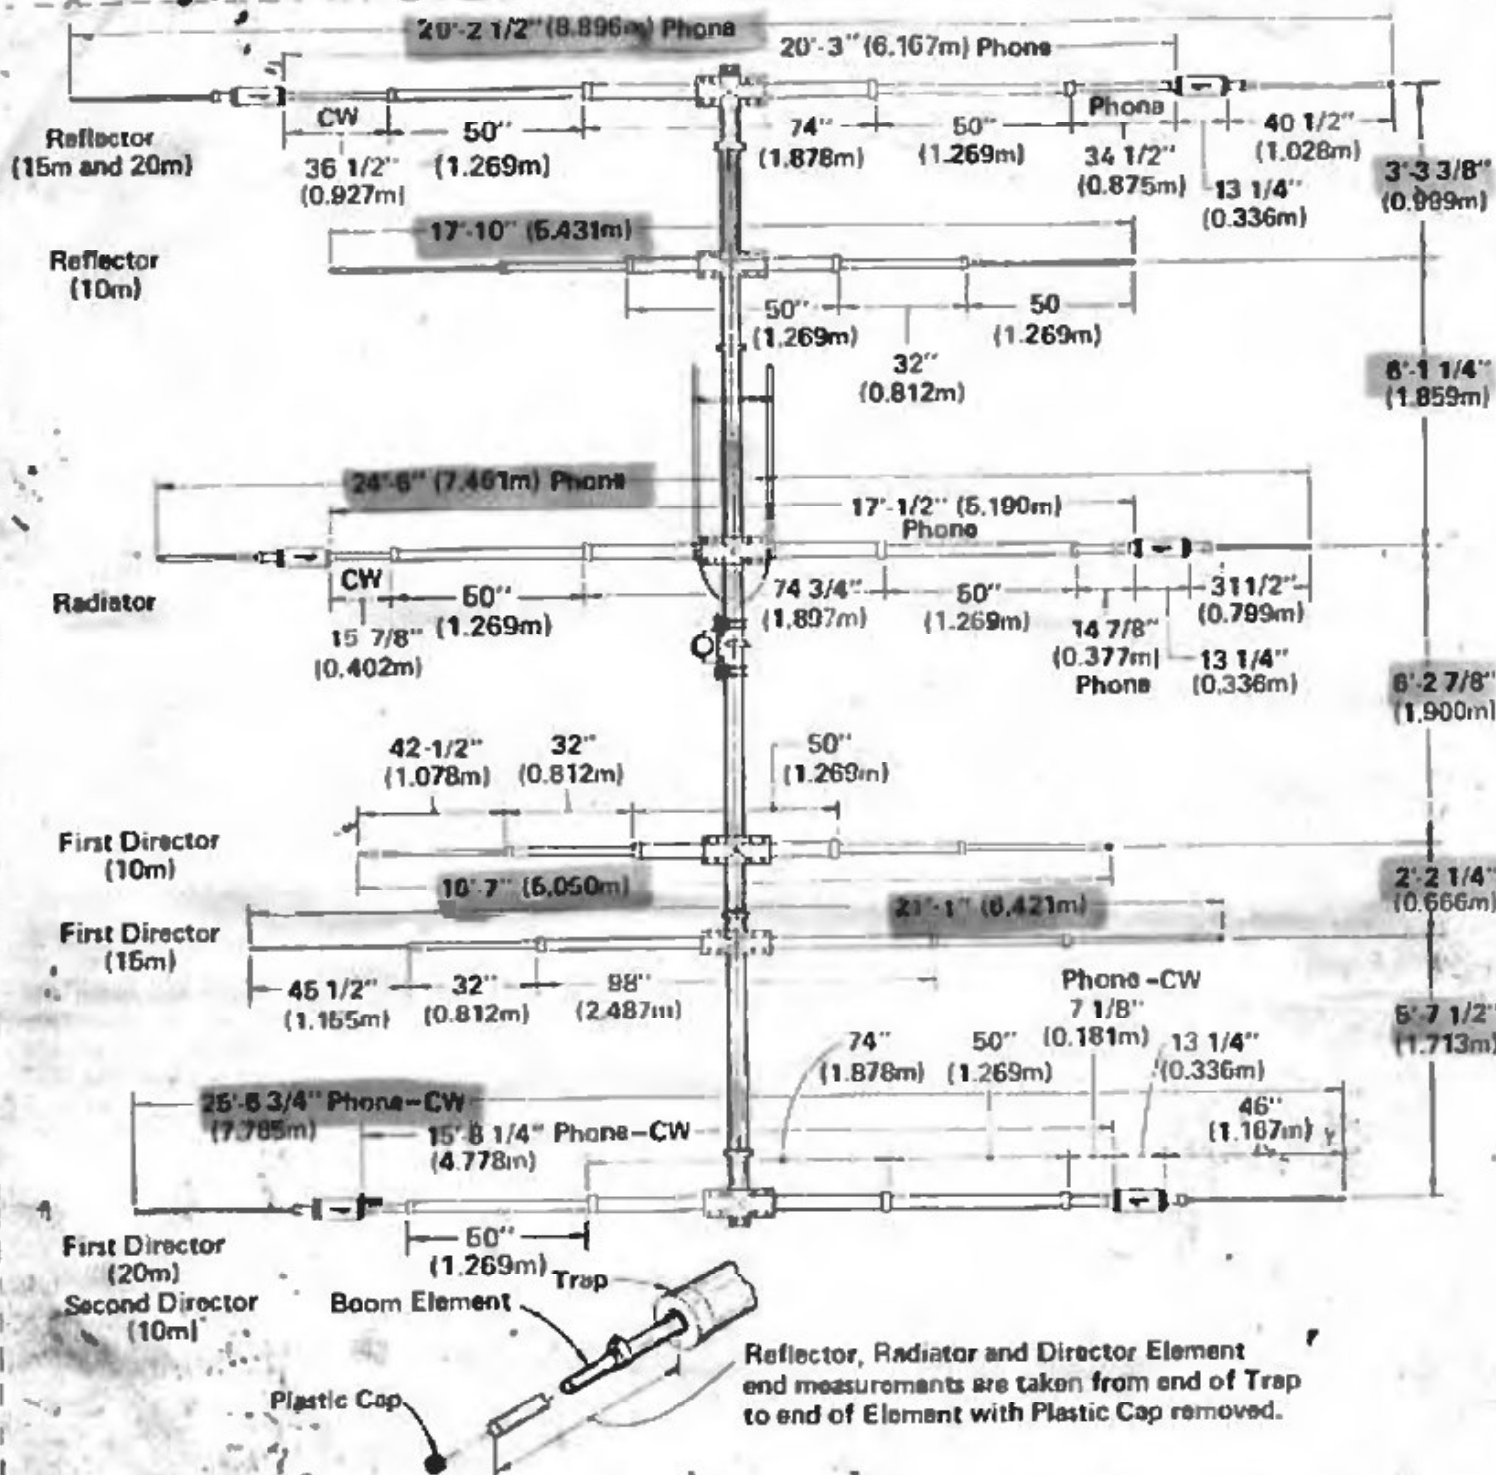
and 4 show a top view of the assembled antenna, and gives part numbers and principal dimensions for assembling and installing the elements. Refer to the parts list (sheet 2) for complete descriptions and specifications and to Figures 5 and 6 for specific assembly details and hardware call outs.
